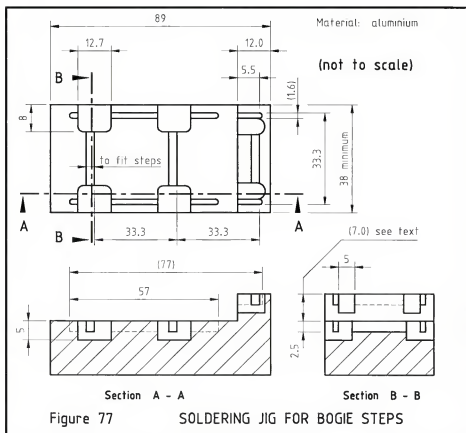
SOLDERING JIG FOR BOGIE STEPS
